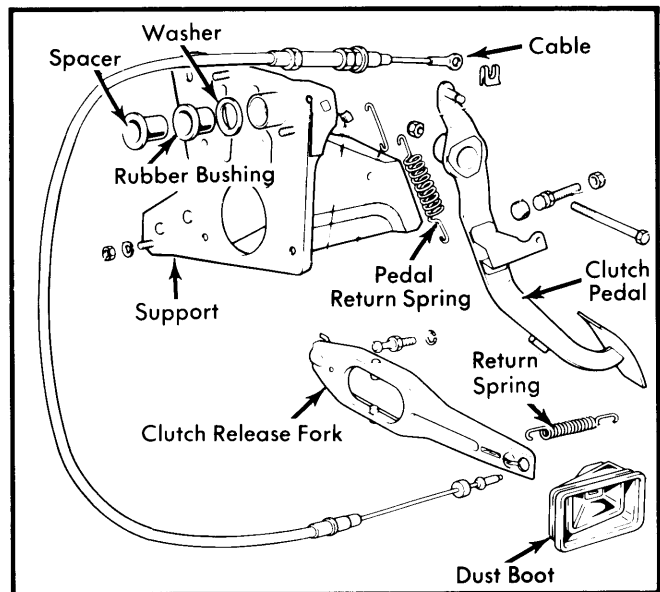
Exploded View of Clutch Cable & Pedal Components
